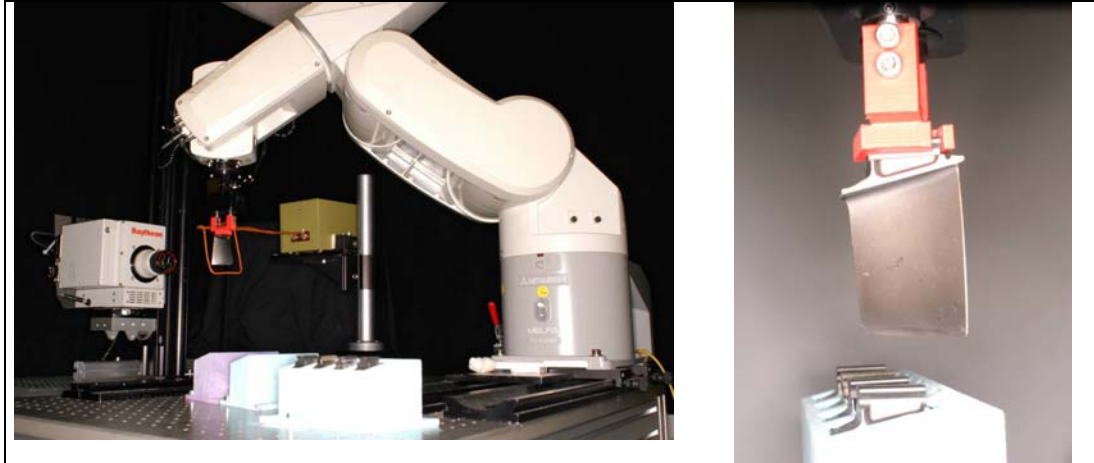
Automated inspection of compressor blades, with a close-up view of the blade holder on the robot arm
